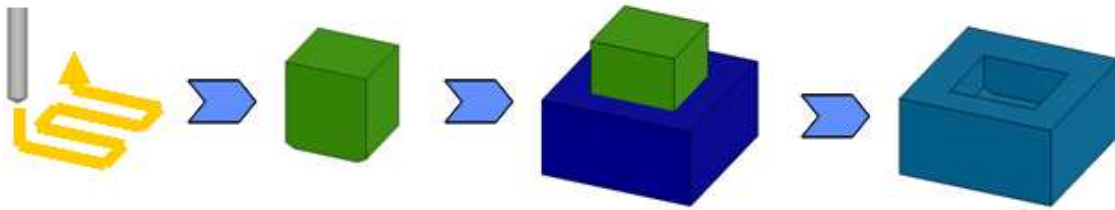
Boolean geometry creation from machining G code, material removal, and machined component.
